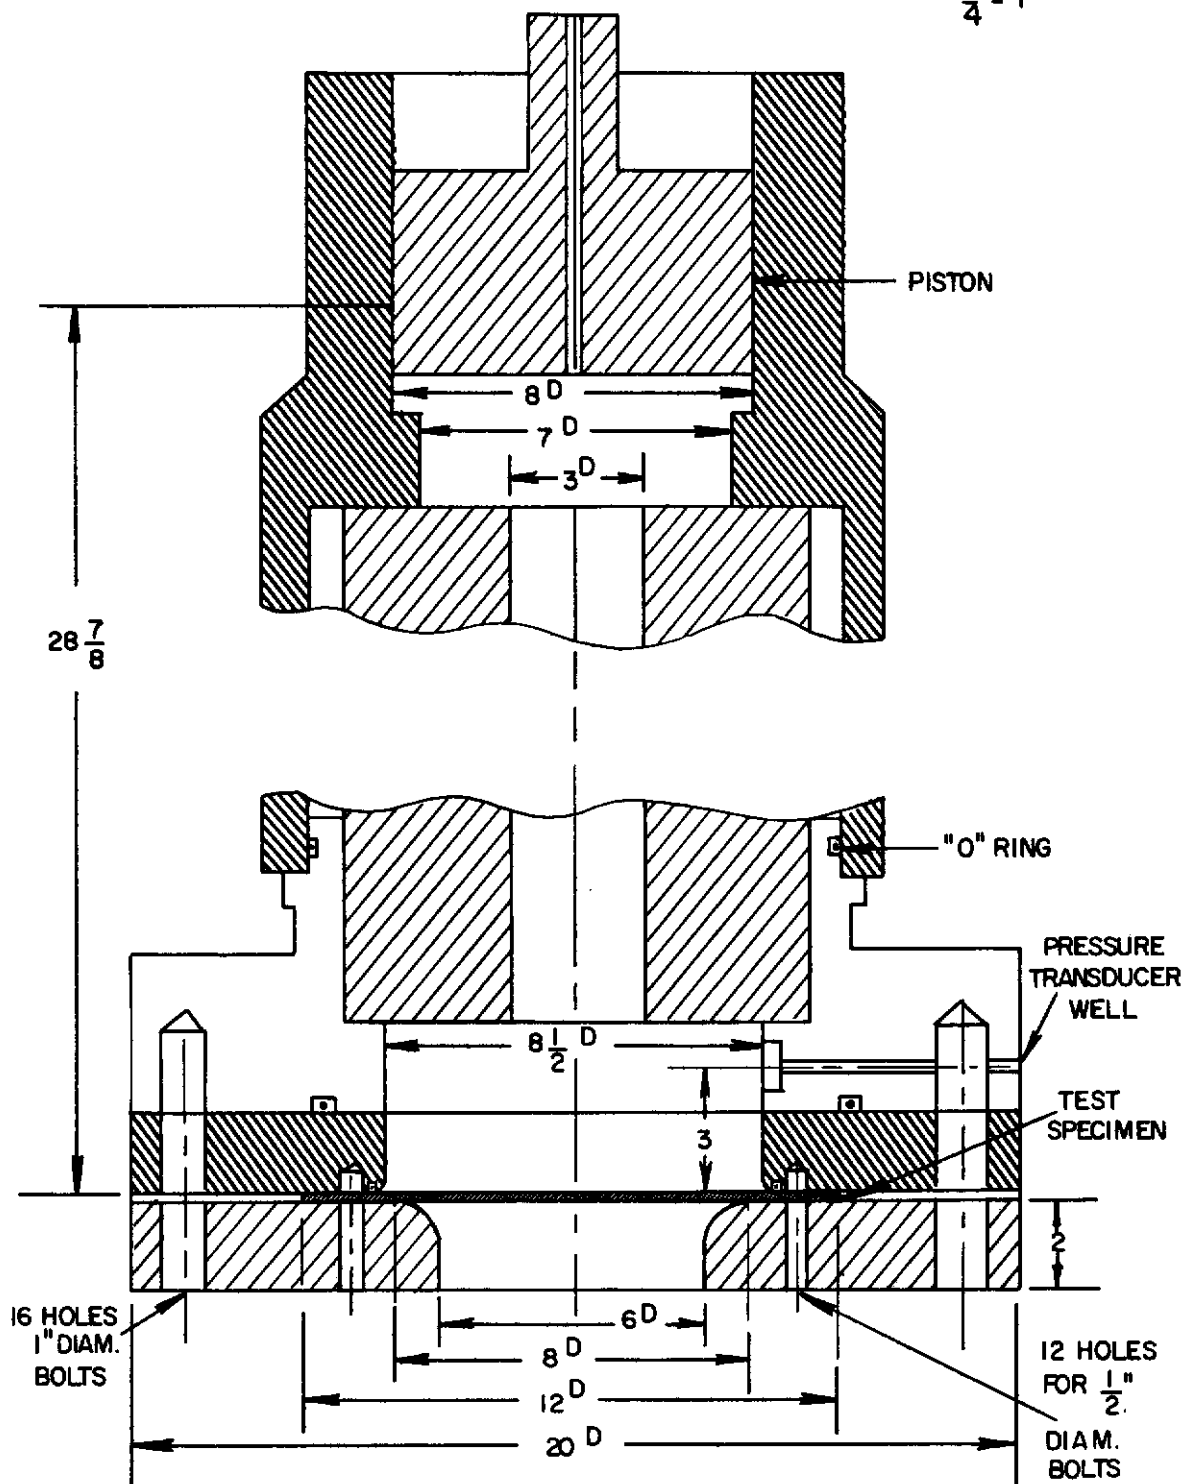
BULGE TEST MACHINE SECTIONAL VIEW
